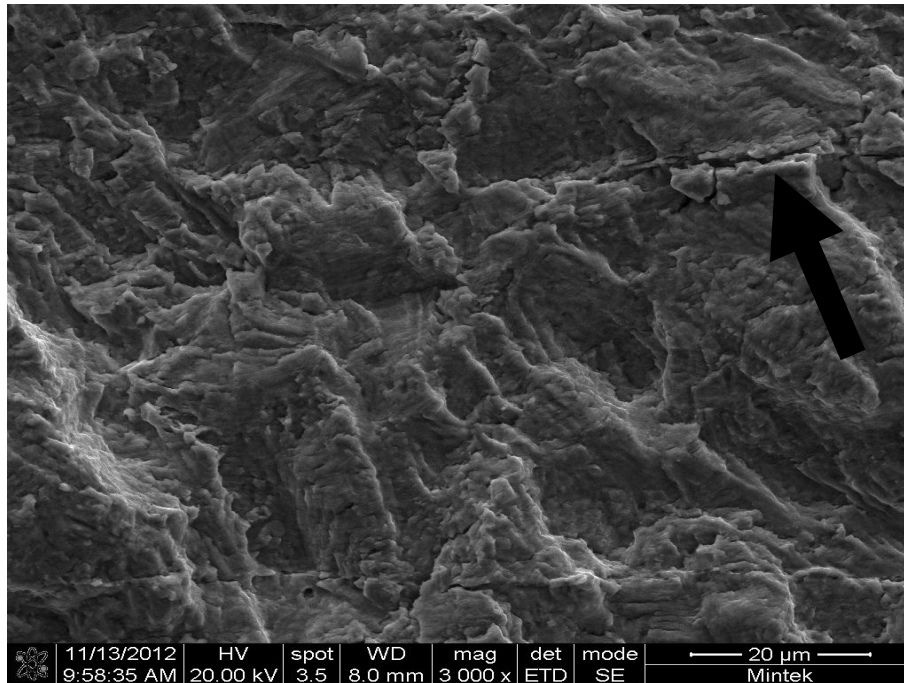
Crack initiation zone of AISI 316L sample carburised at 550°C showing brittle (tearing), with the arrow pointing a secondary cracking within the fractured surface.
